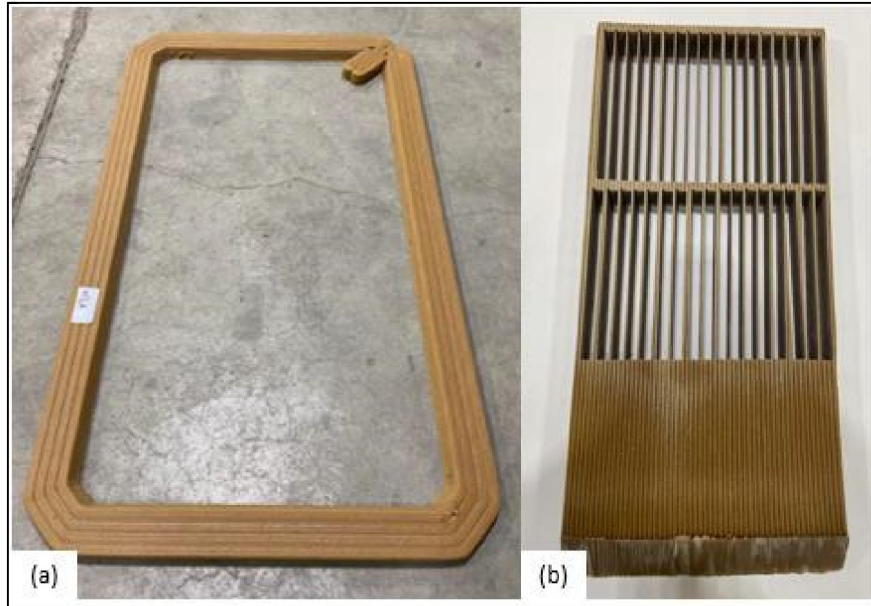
WF/aPLA material (a) 1.6 in thick form, and (b) 1.5 in thick plate after waterjet cut of specimens.
